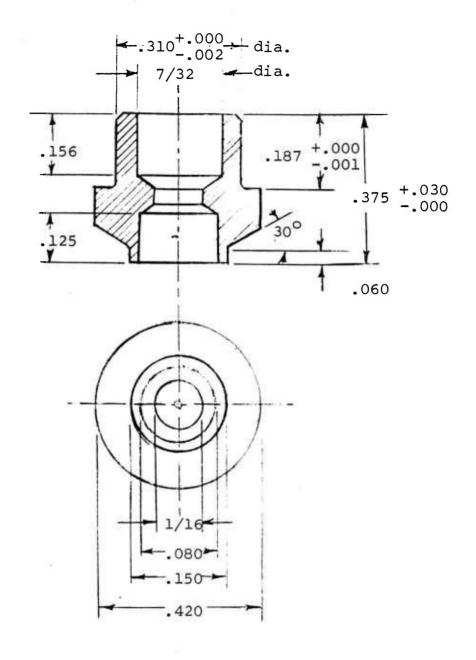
Ultrasonic ring welding tip for M55 detonator.
